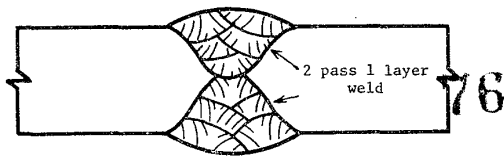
Recomendable built-up sequence for stainless steel welded joint.
